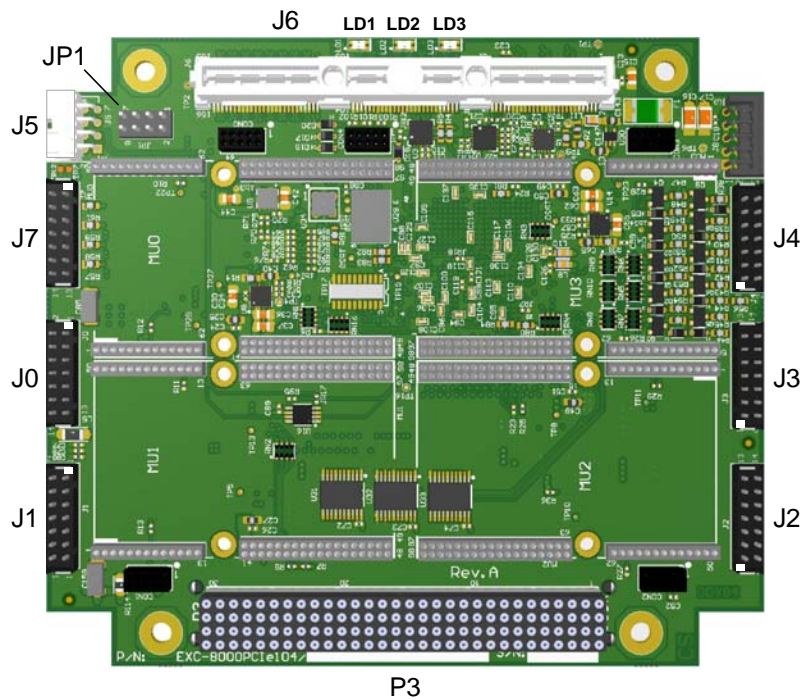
EXC-8000PCIe104 Board Layout – Top View
